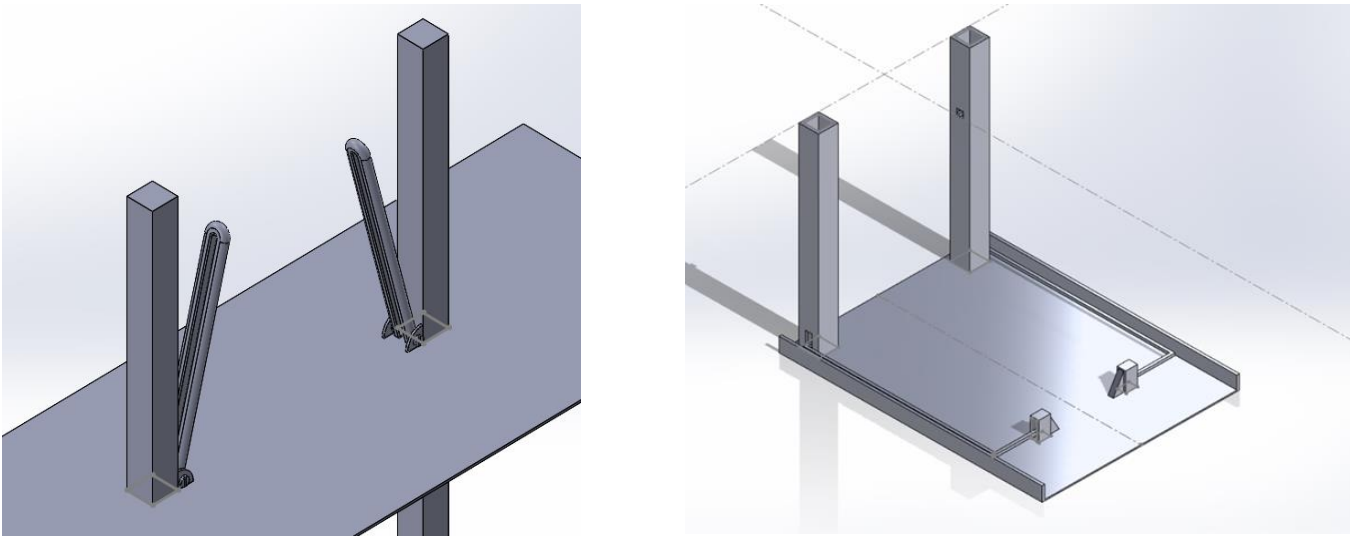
SolidWorks of expanding K-frame gate (left) Mock-up SolidWorks of ride-on (right).
